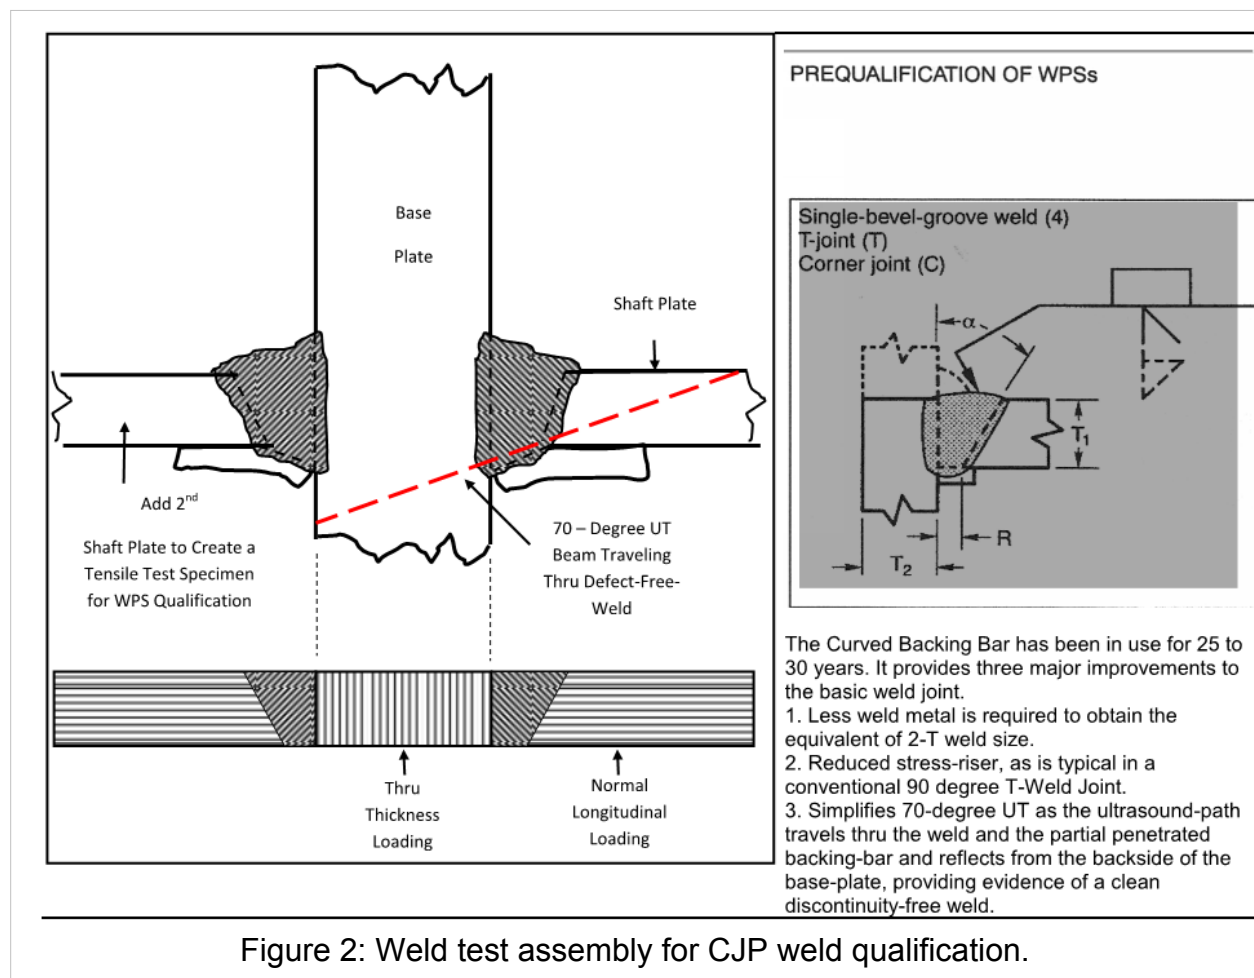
Weld test assembly for CJP weld qualification.
